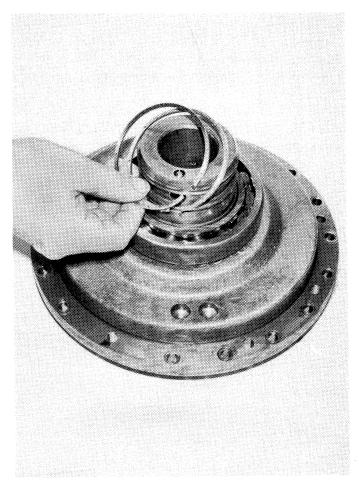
Piston Rings Removed from Rear of Clutch Cylinder.
